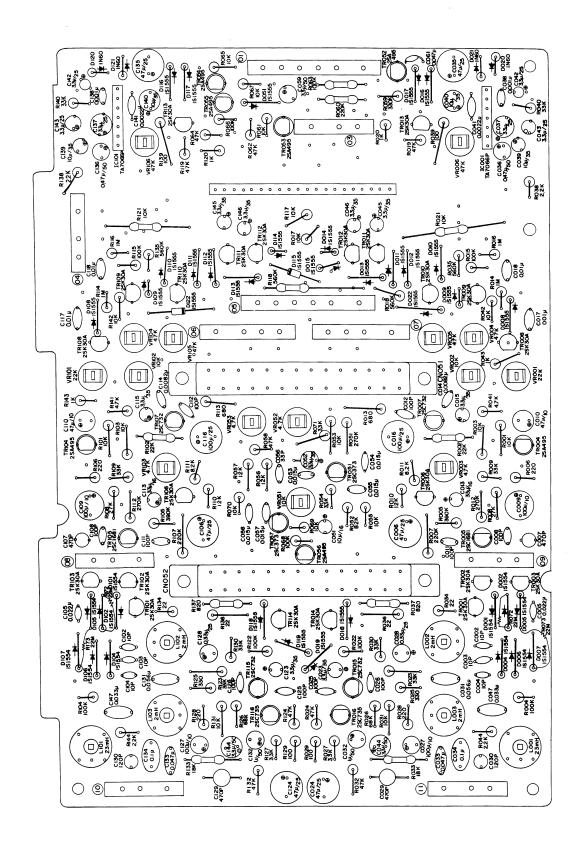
Top View of Pre-amplifier P.C. Board, PC-001
